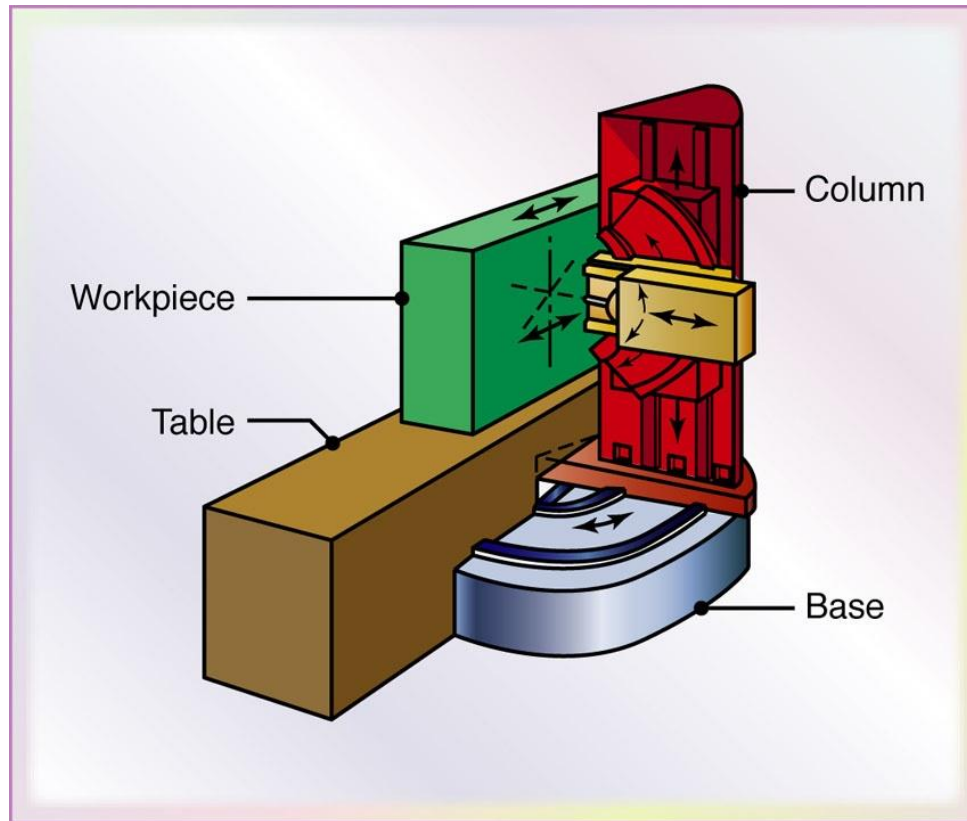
Schematic illustration of a five-axis profile milling machine. Note that there are three principal linear and two angular movements of machine components.
